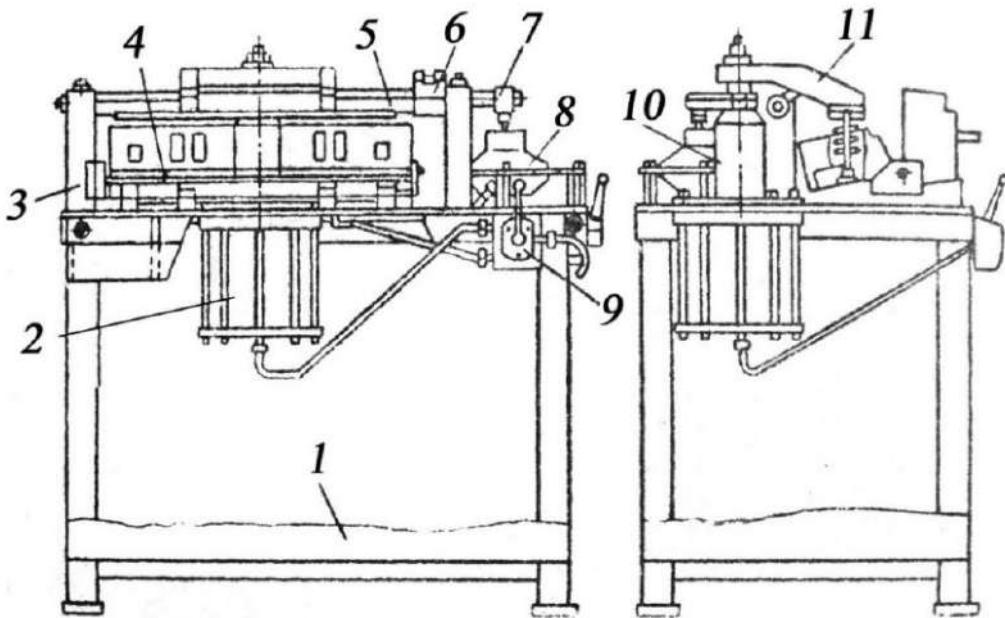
Stand for disassembling and assembling cylinder heads:
